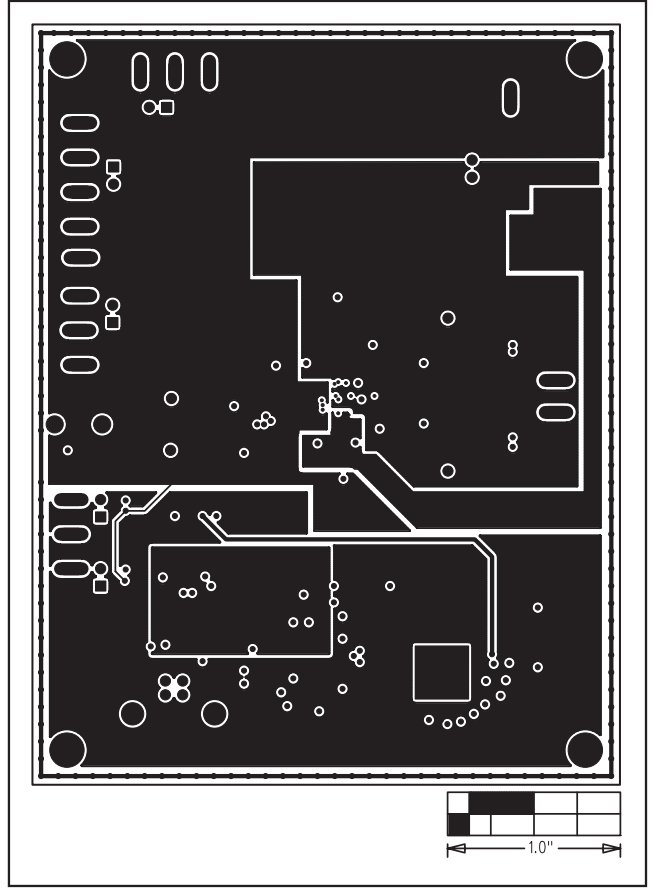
MAX9796 EV Kit PCB Layout—Layer 3 (Power)
